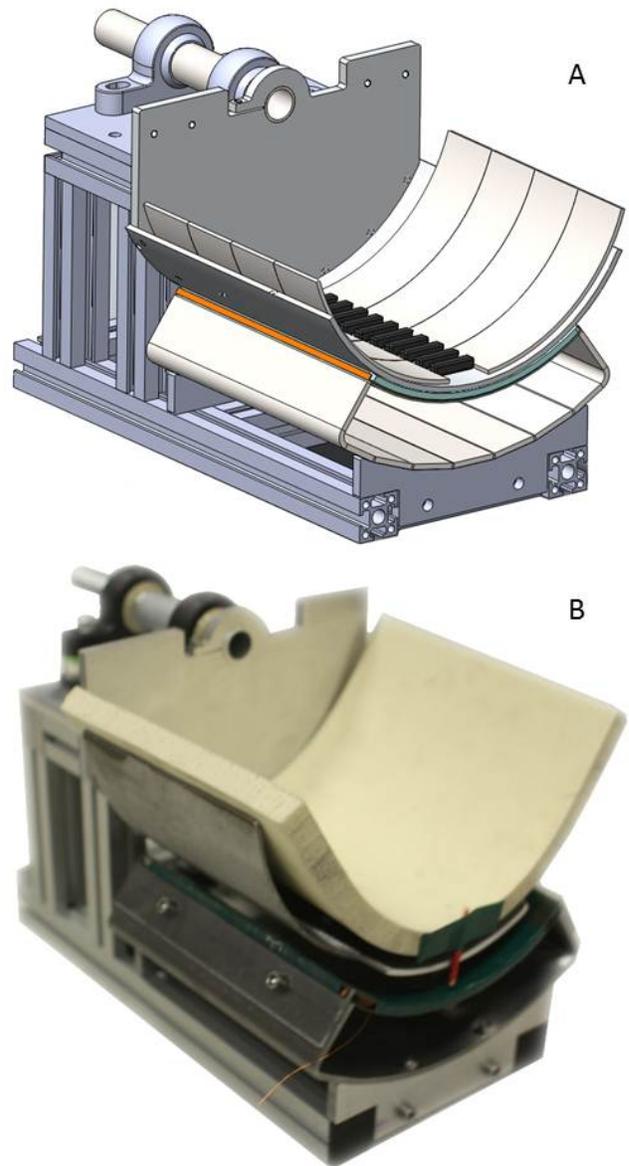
Head Actuator. (A) Final CAD model and (B) constructed prototype of Lorentz force actuator.
